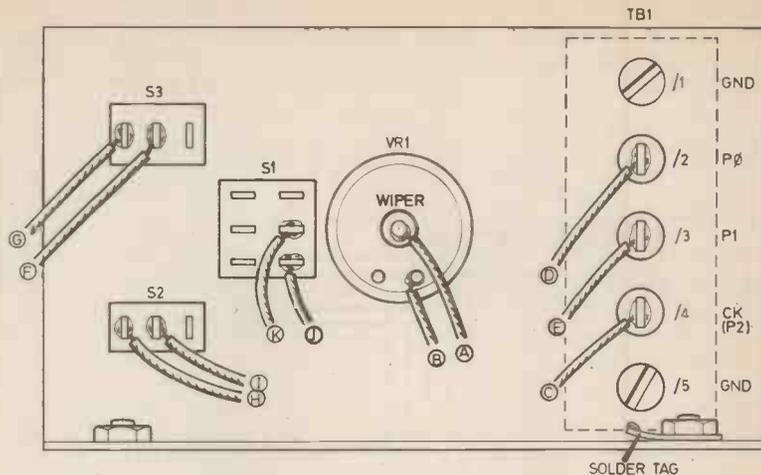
Position of the components on the Manual Controller front panel with complete wiring details to the p.c.b. This panel is "earthed" via the solder tag connection at one panel fixing.
